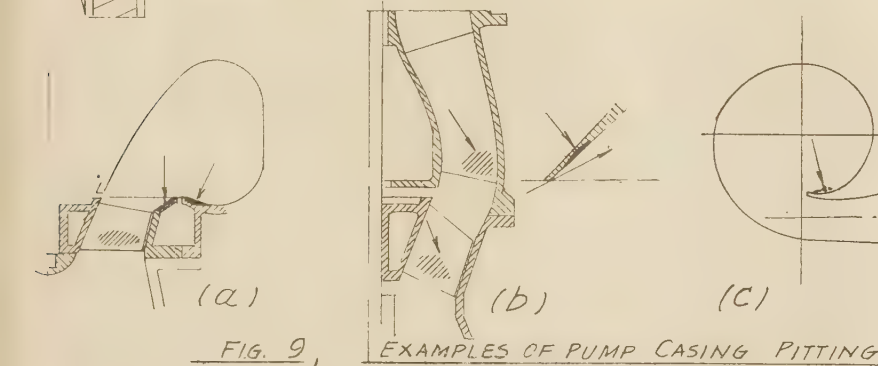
, EXAMPLES OF PUMP CASING PITTING
